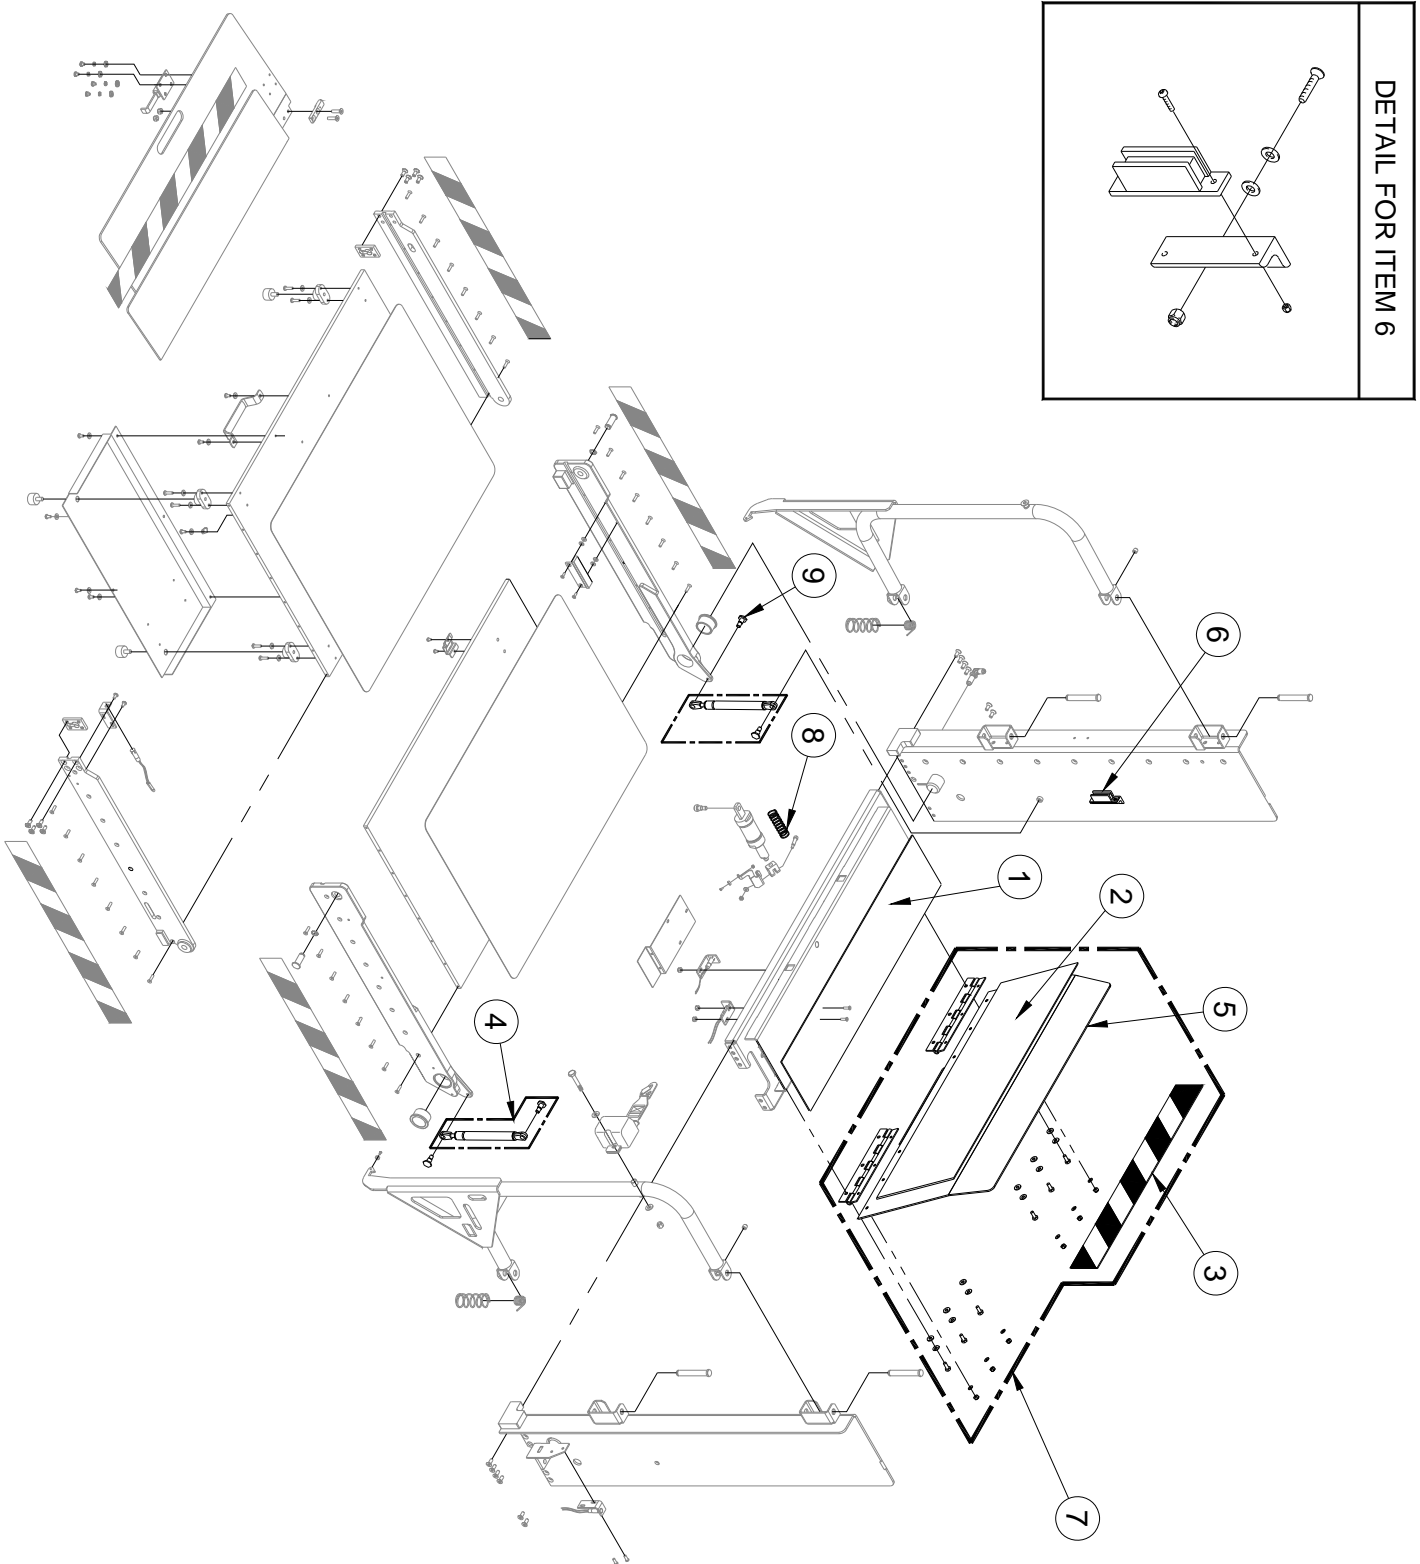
PLATFORM ASSEMBLY SHEET 2
